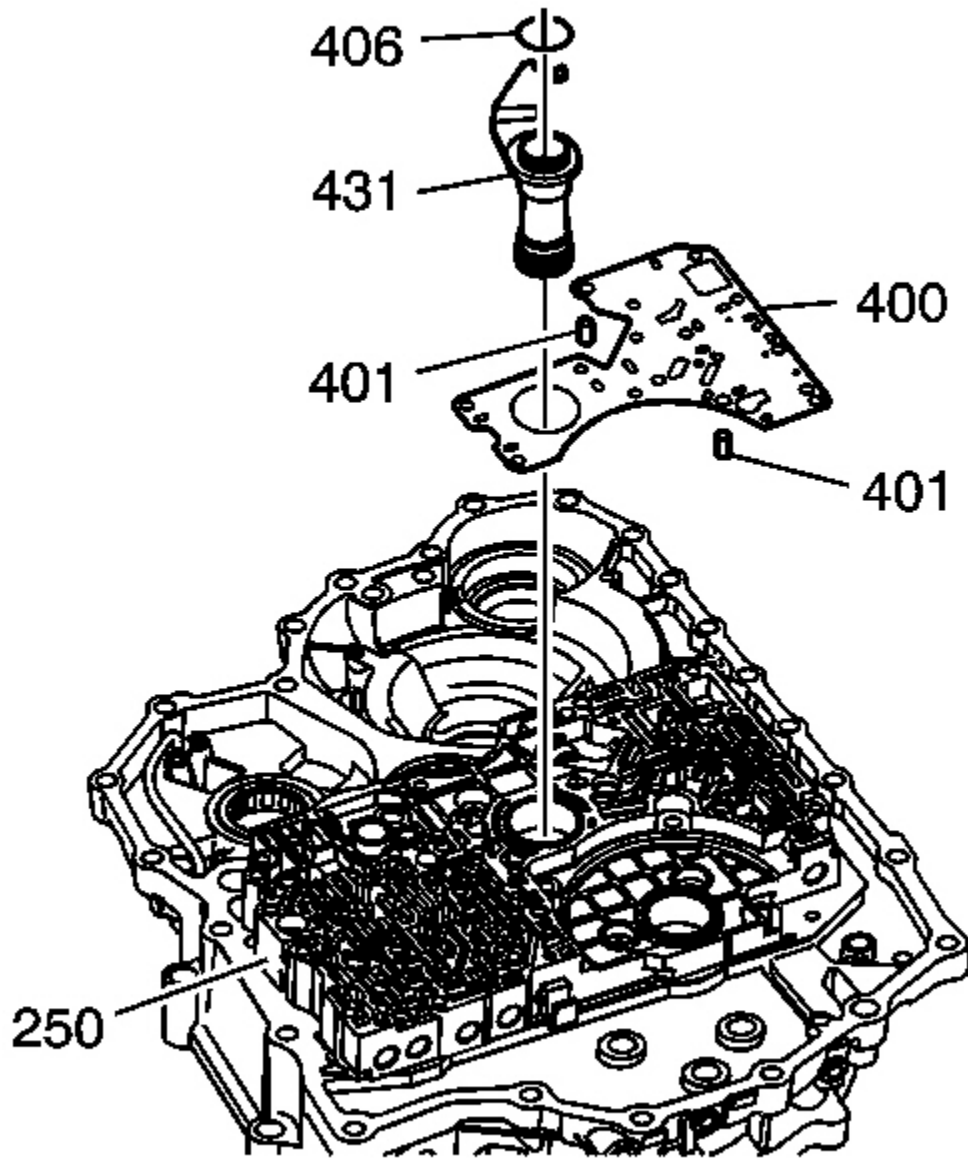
Regulator Spacer Plate, Locating Pins, Stator Shaft & Torque Arm Assembly
